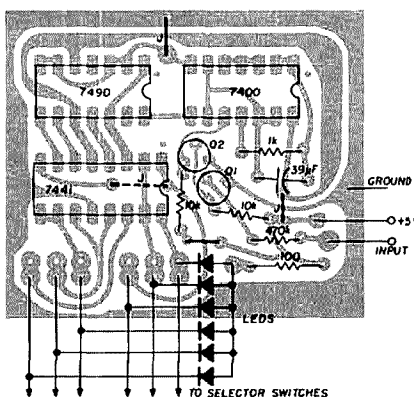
Component layout for the fm scanner board. Letter J designates a jumper.
